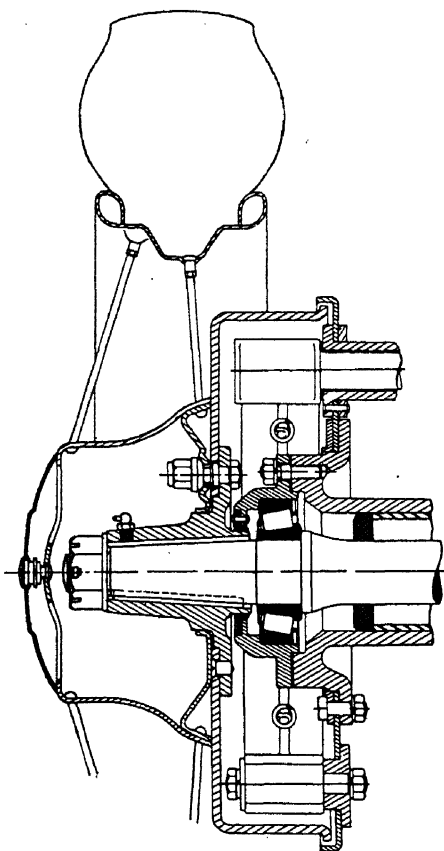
Semi-Floating Rear Axle, with Brake Drum and Wire Wheel.
